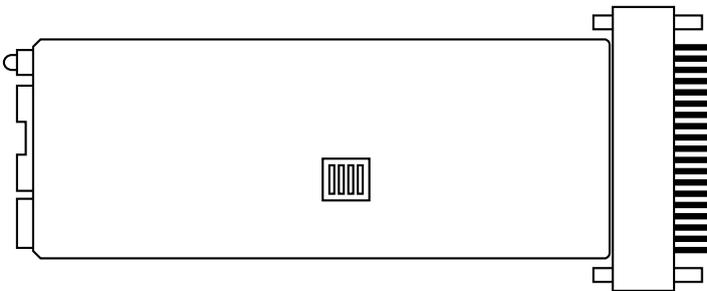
Switch S1 (located on the bottom of the IC701A’s PC board).
